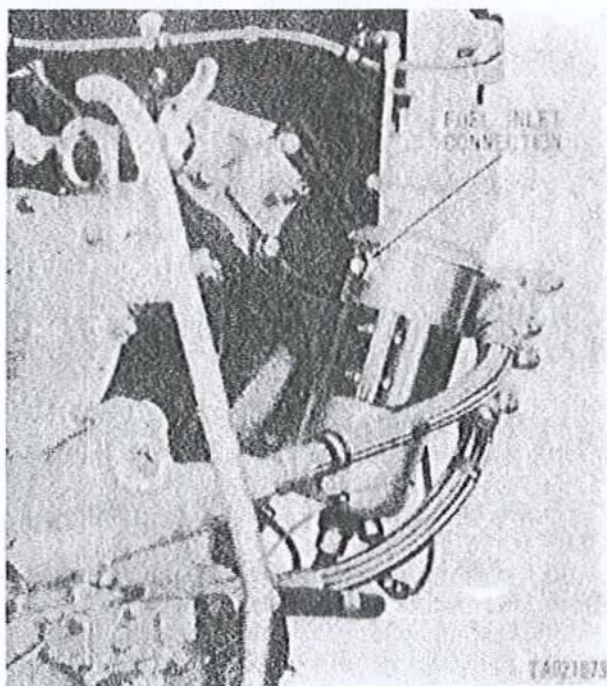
Installed primary fuel filter, model AVDS-1790-2D engine.
